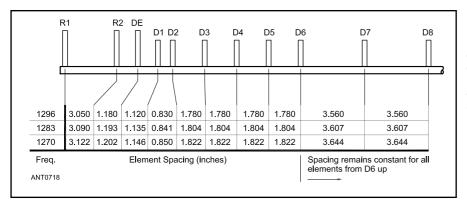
Boom drilling dimensions. These dimensions must be carefully followed and the same materials used if performance is to be optimum. Element spacings are the same for all directors after D6 — use as many as necessary to fill the boom.
